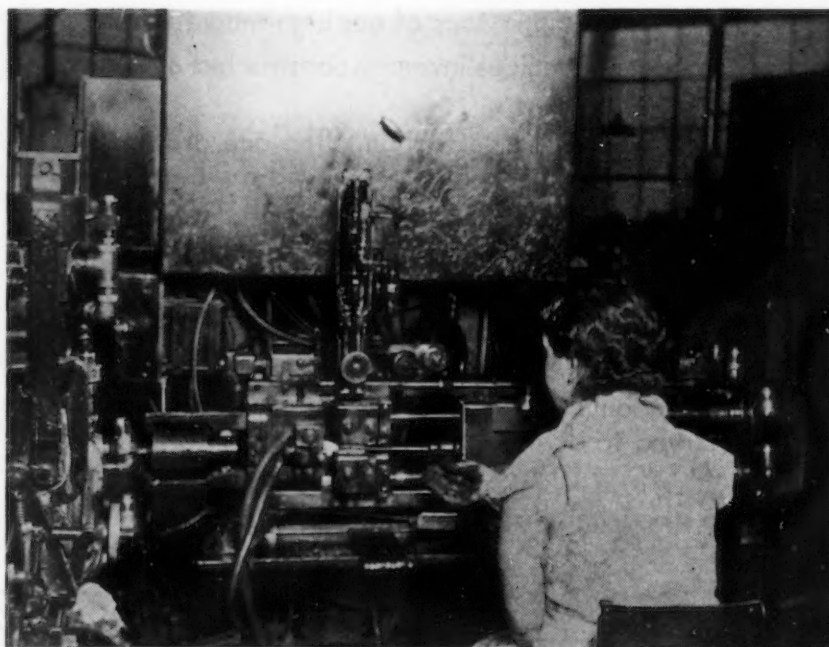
Stock is fed automatically into the "gathering machine"; before being formed or gathered it is heated electrically.
